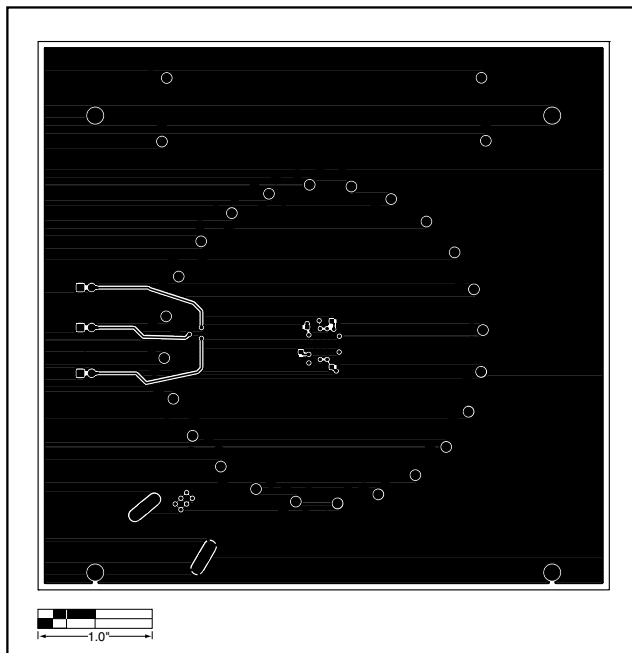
MAX3781 EV Kit PC Board Layout—Solder Side
